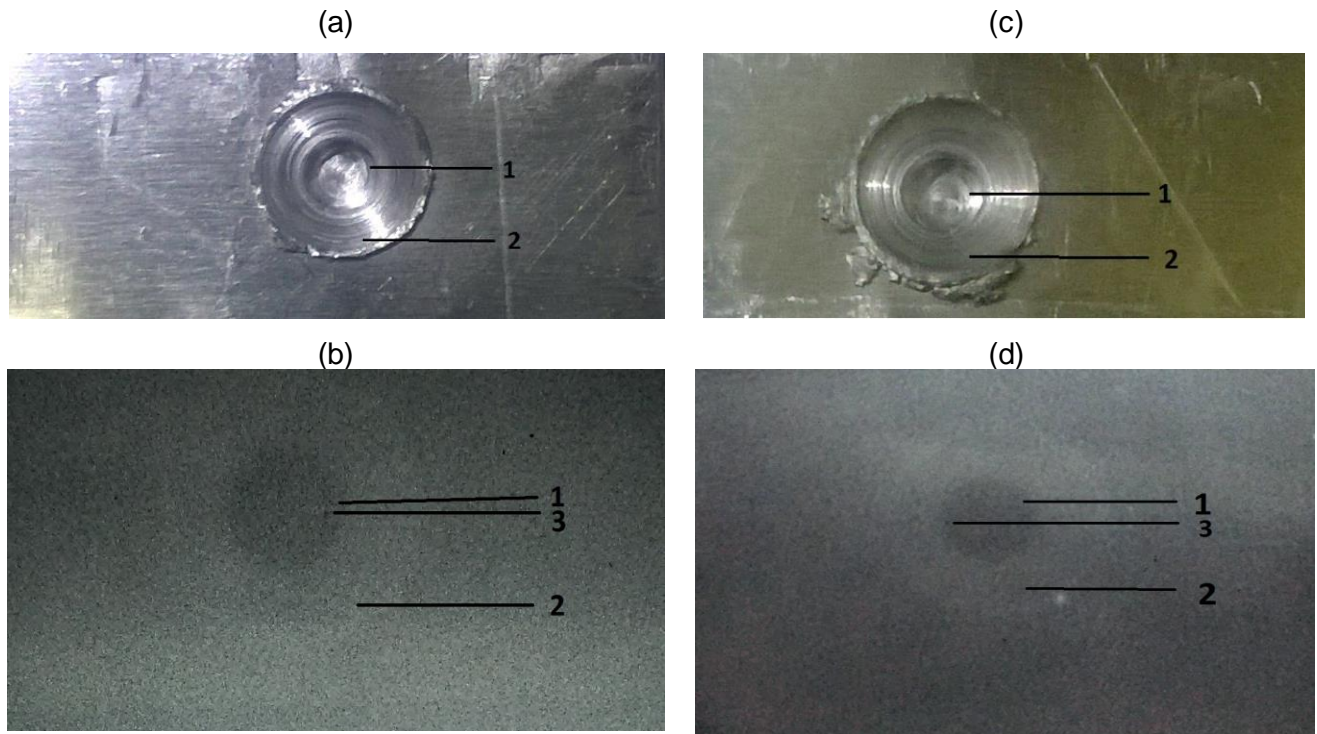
Image of weld (a) Surface of weld 2 (b) Radiography image of weld 2 (c) Surface image of weld 11 (d) Radiography image of weld 11
